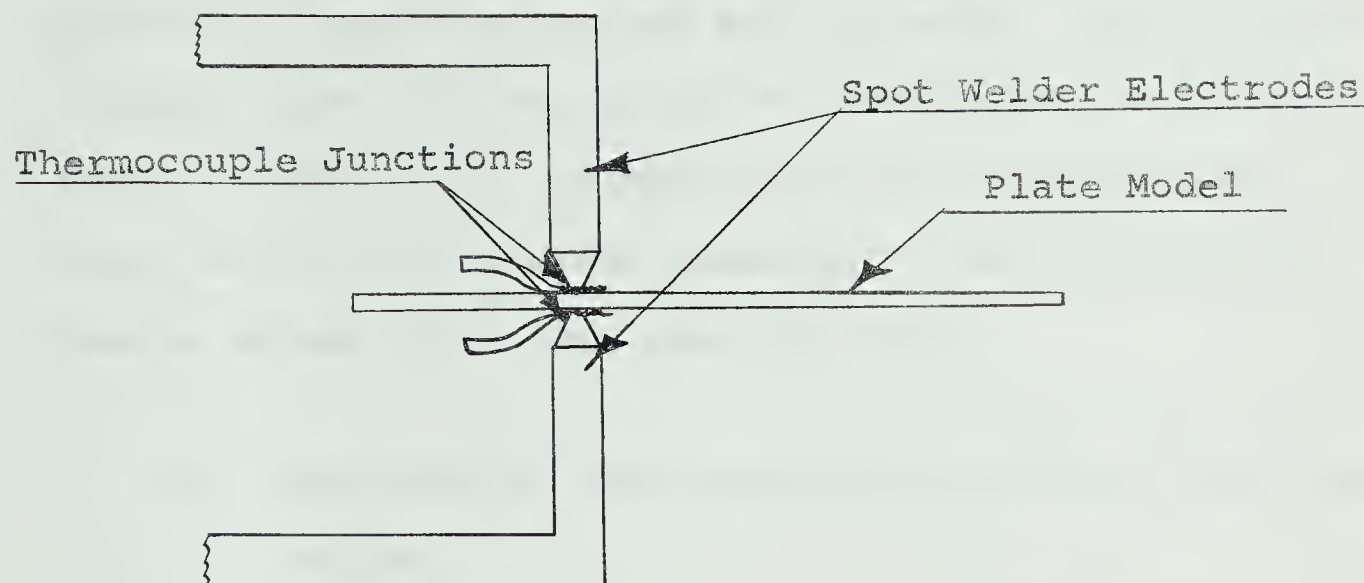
Spot welding arrangement, showing the Spot Welder Electrodes, Thermocouple Wires and the Plate Model.
